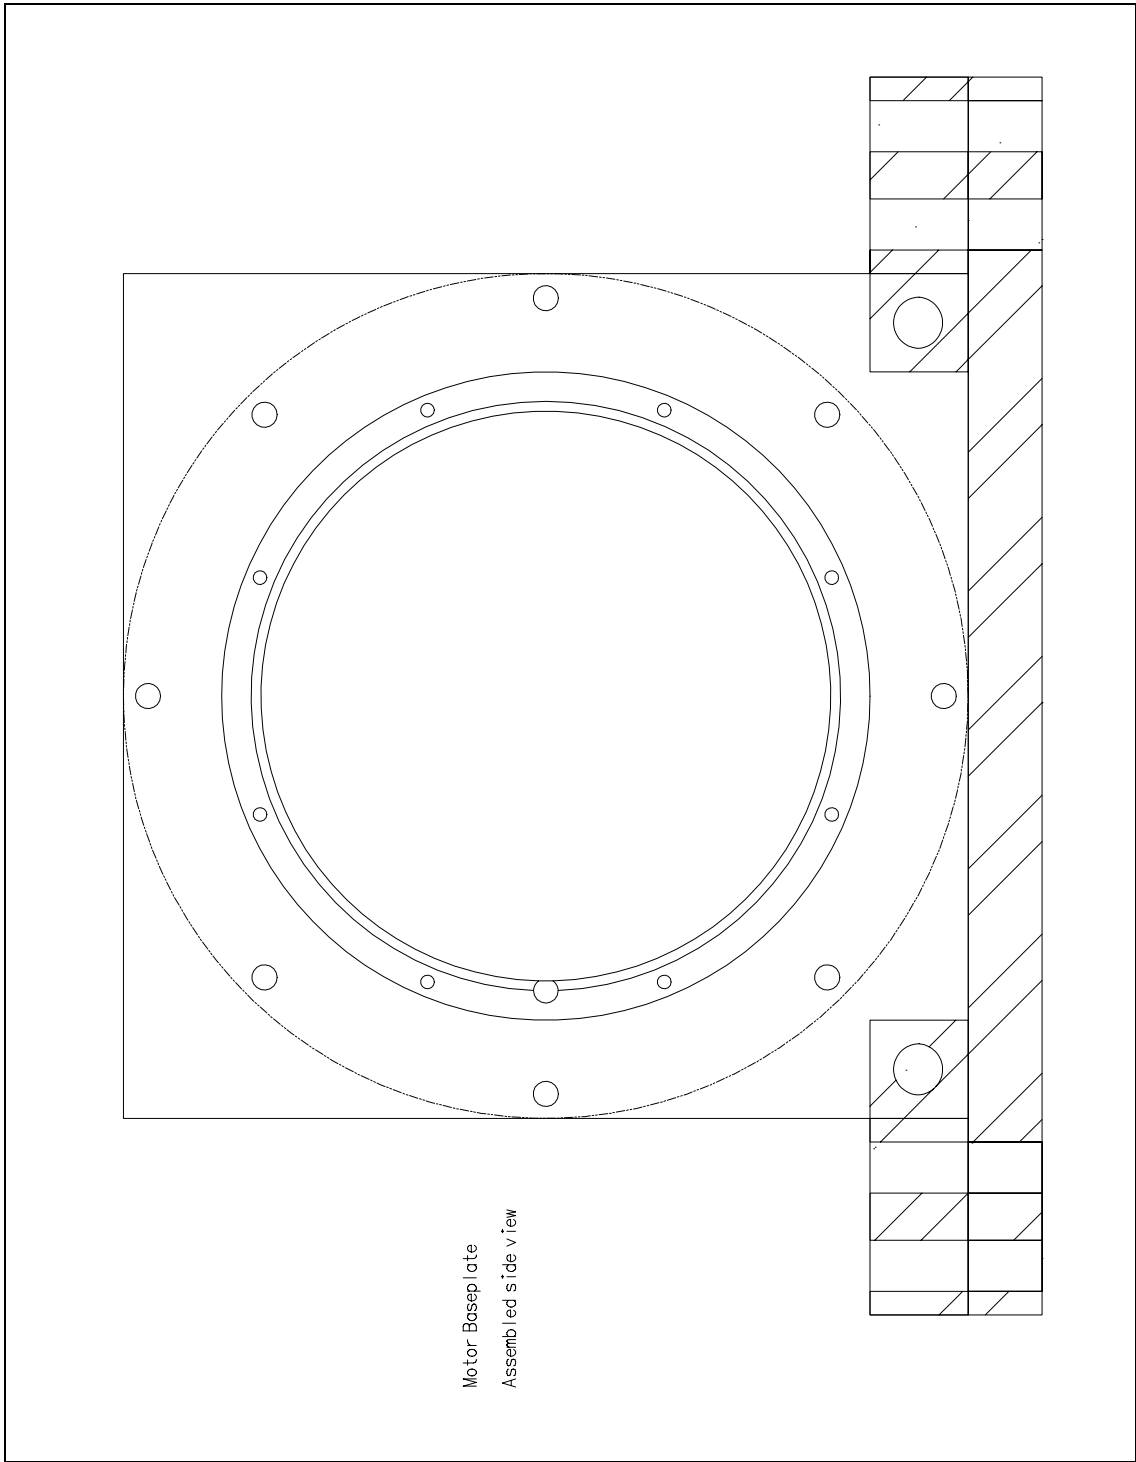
Side view of assembled flywheel mounted on its baseplate.
